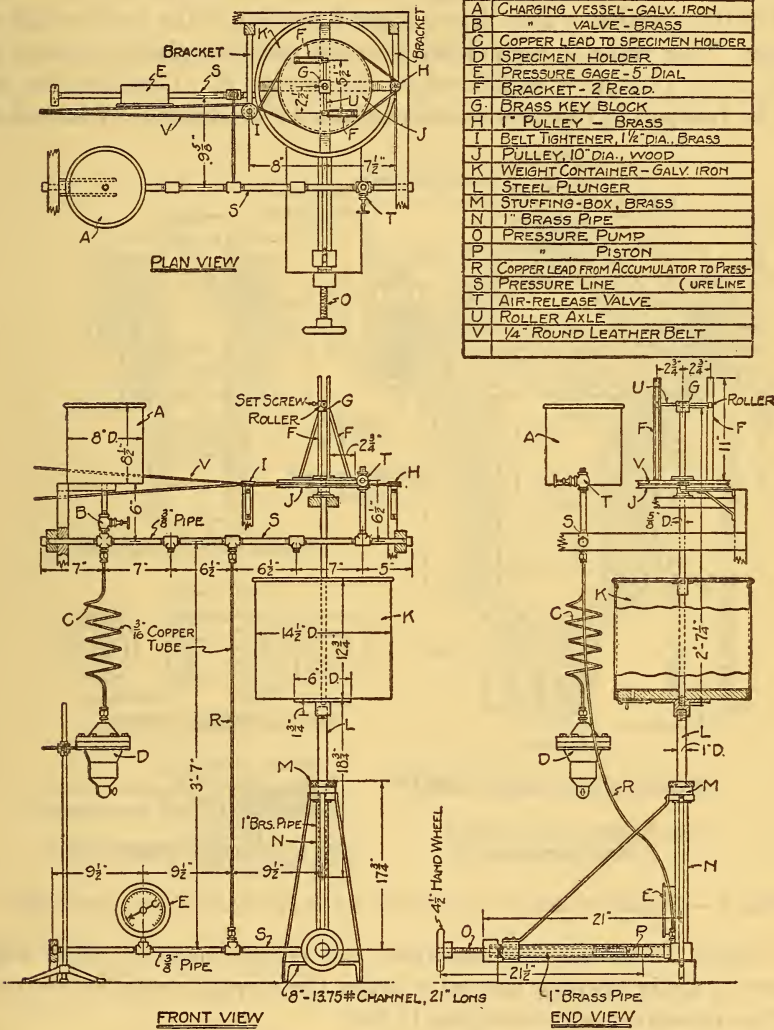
Plan, front and end views of apparatus with essential parts designated
